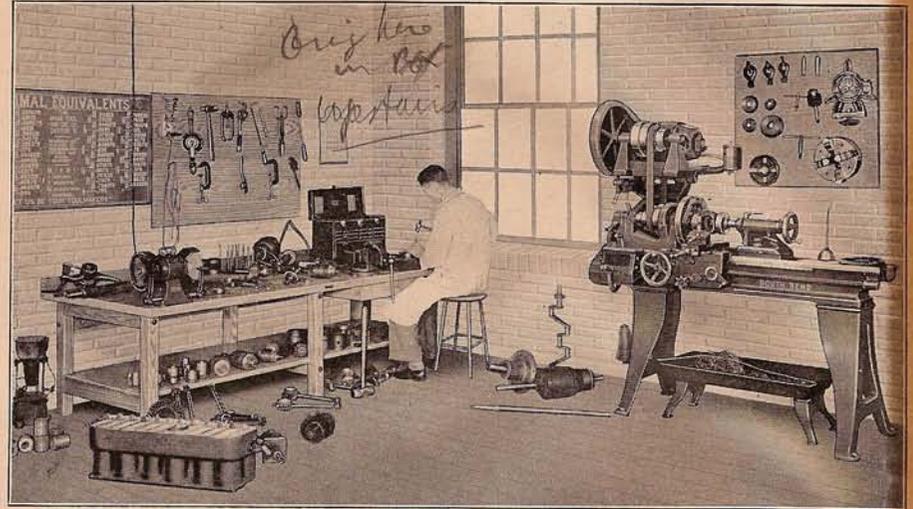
The No. 13 Auto Service Shop Equipped with Lathe and Equipment for Servicing Differentials, Connecting Rods, Armatures, Valves, Pistons, Bushings, Etc.
